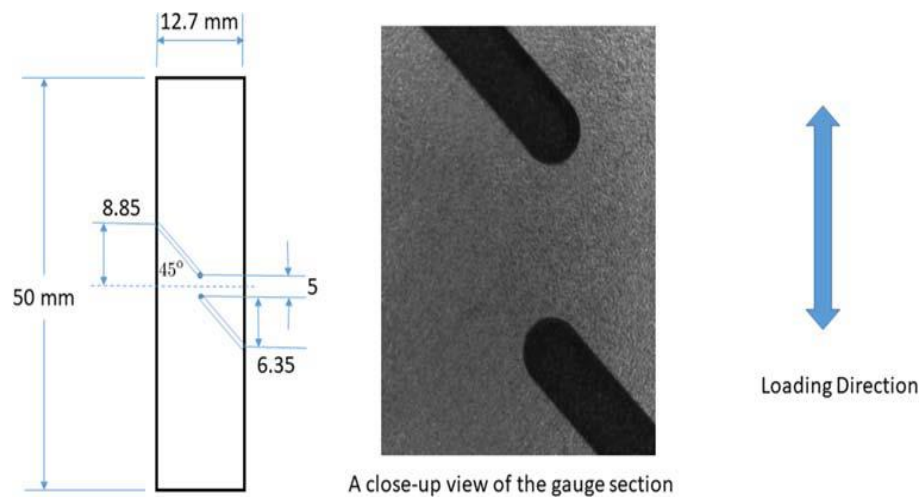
Dimensions of Type-B shearing test coupon and a close-up view image of an as-machined AA6111-T4 sheet sample with a thickness of 1.2mm.
